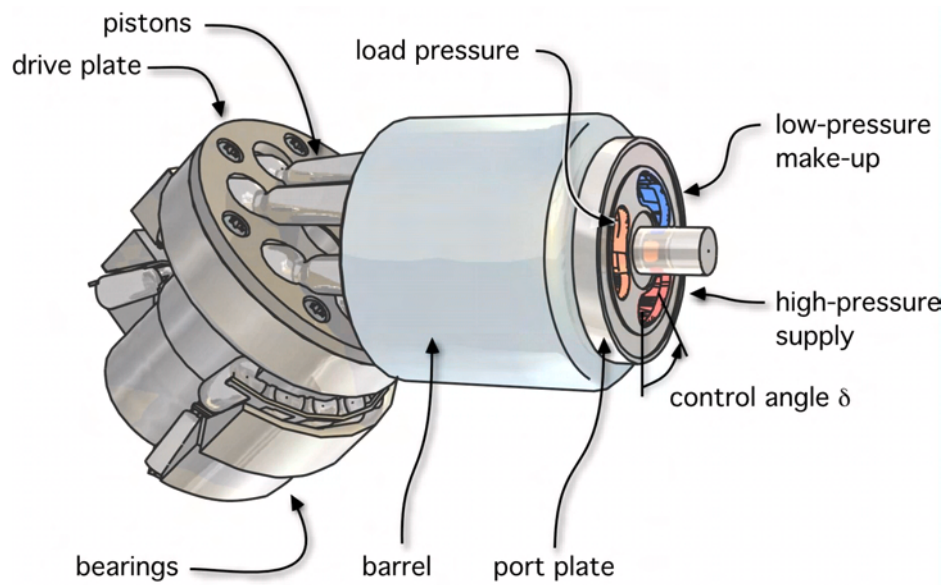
First prototype of the Innas Hydraulic Transformer, showing only the rotating parts and the port plate. Except for the port plate and the end-cap all the other parts originated from a bent axis axial piston motor
